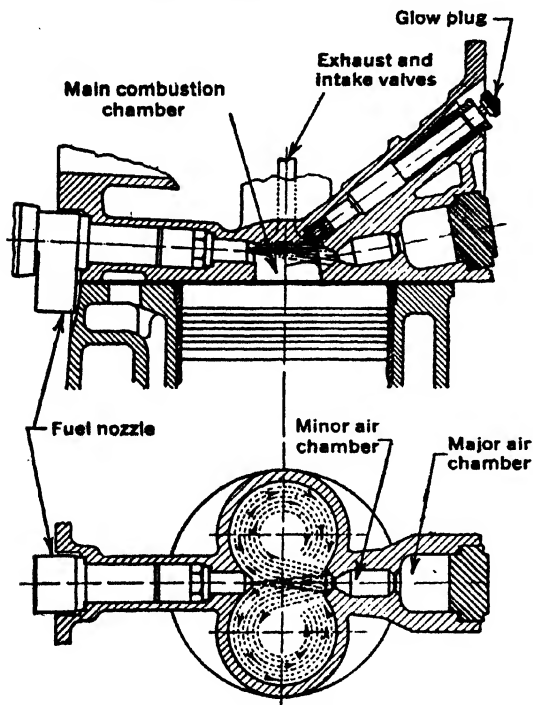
Buda-Lanova high-speed Diesel engine; above, part sectional elevation of combustion head; below, sectional plan showing the double annular combustion space.
